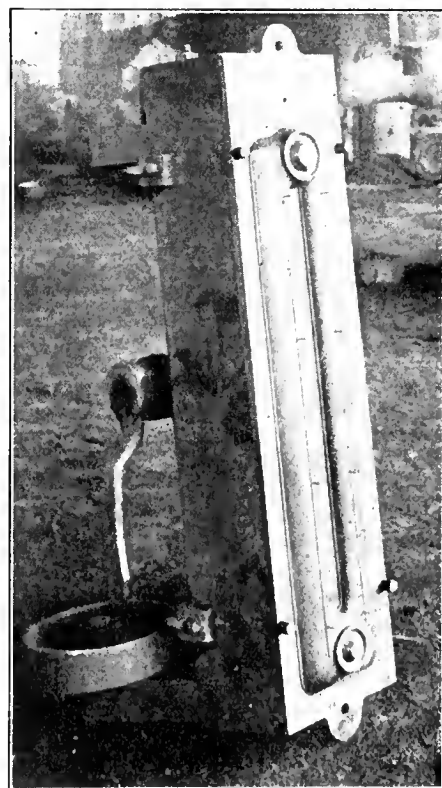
MOLDING MACHINE FOR RADIATOR SECTIONS.
